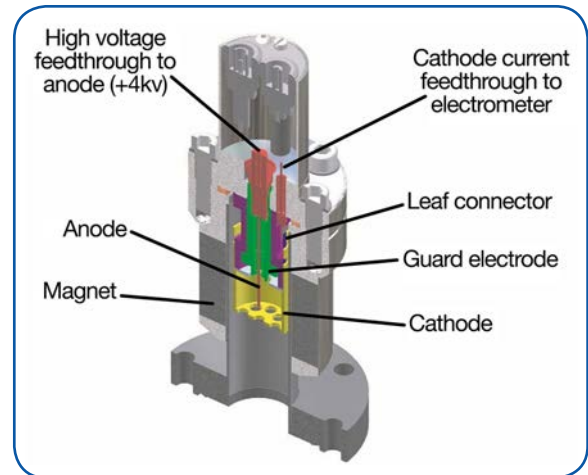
Cutaway view of an MKS inverted magnetron cold cathode sensor.
